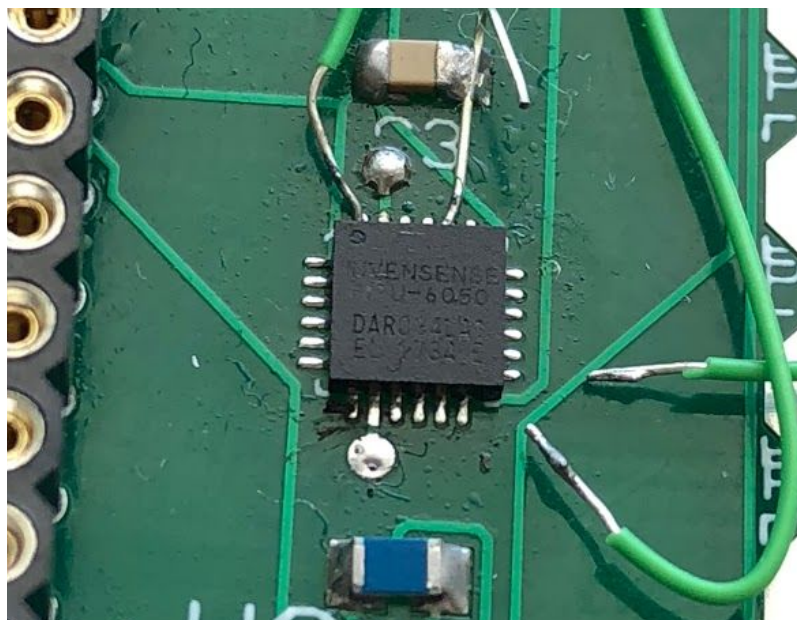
Glove Unit PCB zoomed in on MPU-6050.
